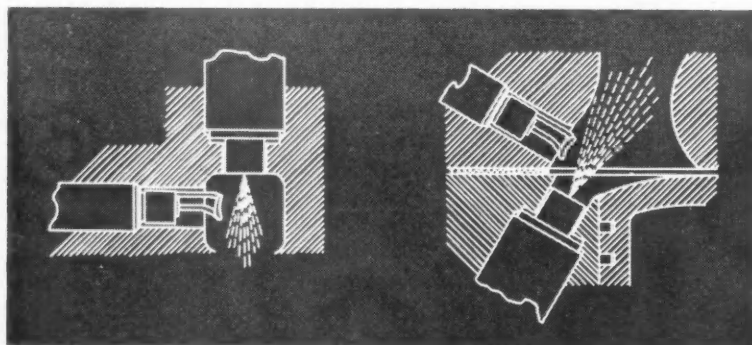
Placing of glow element in the fuel spray should be avoided to minimize corrosion.
